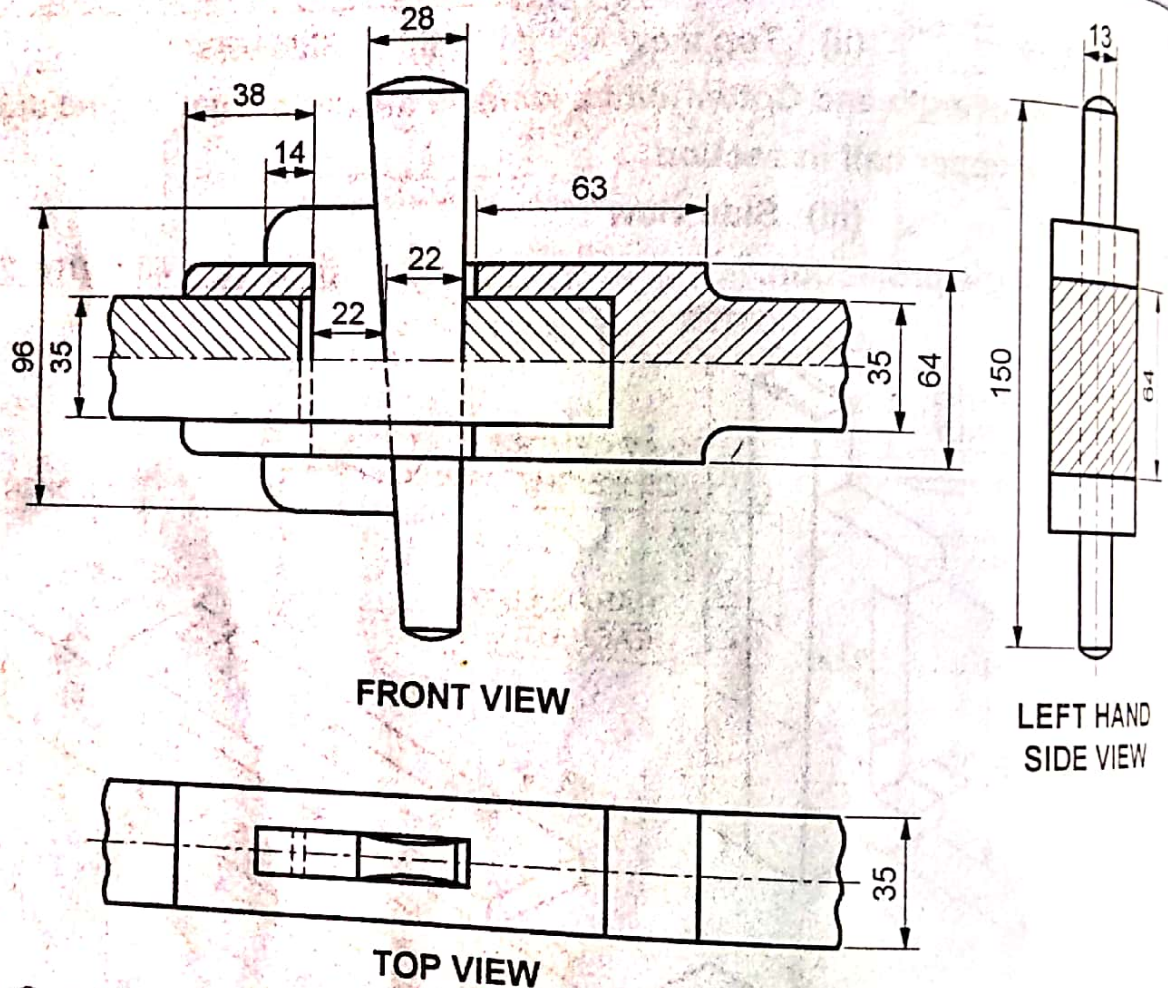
Q. 3.11 : Orthographic Assembly Drawing (Views) of Gib and Cotter joint
